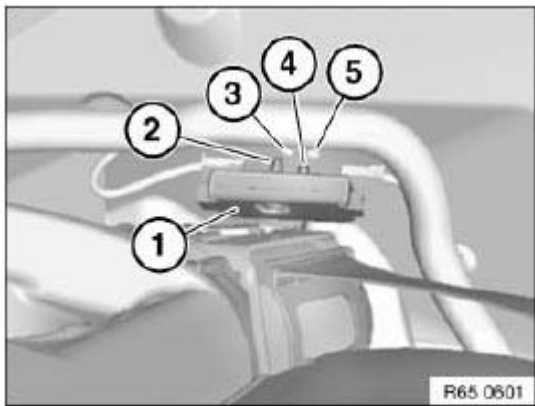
Identifying Filter, Screw, Thread, Pin And Bore
